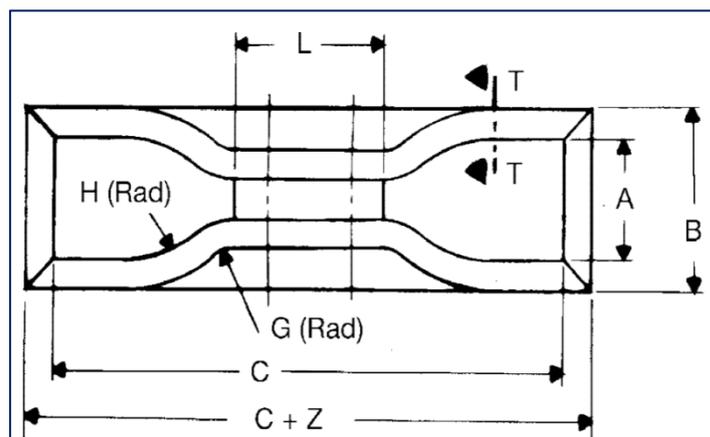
Dumbbell-shaped specimens for tensile test with determined dimensions[88].
